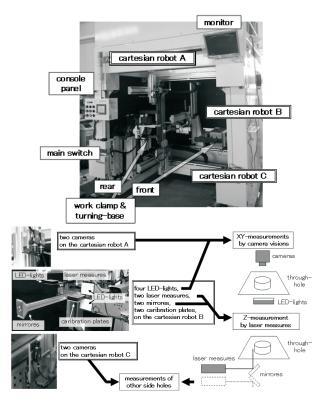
The auto measurement and auto inspection machine for the motorcycle frames.
